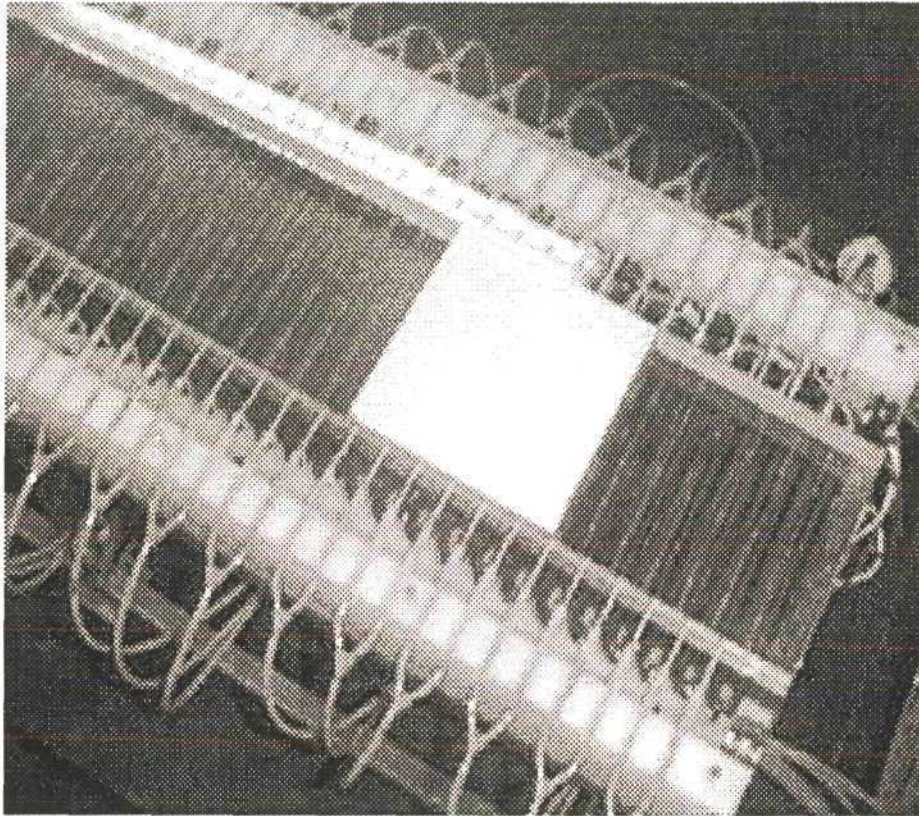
Material handling system with cordless courier and integrated reverse air bearing armature platen.
